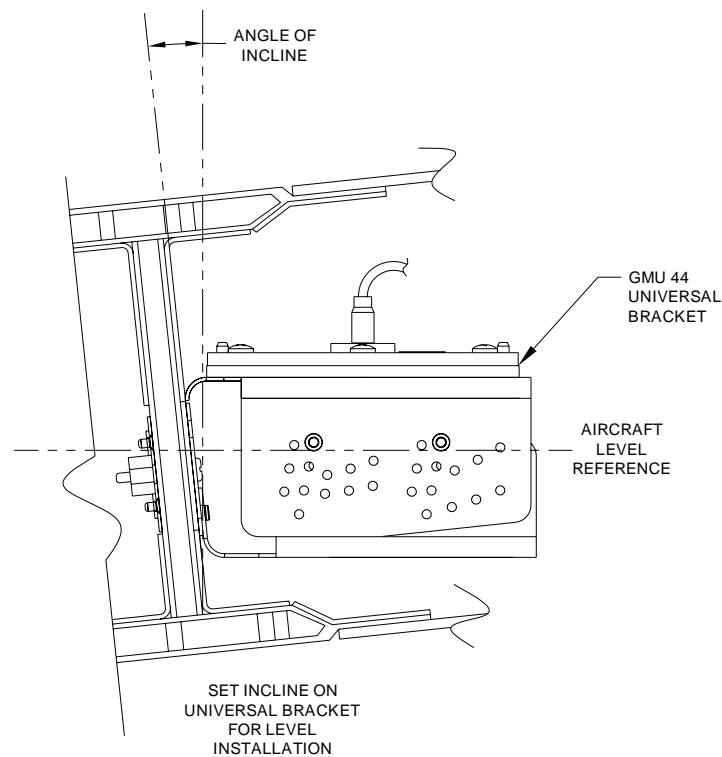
GMU 44 Universal Mount Level Installation Axis 2
